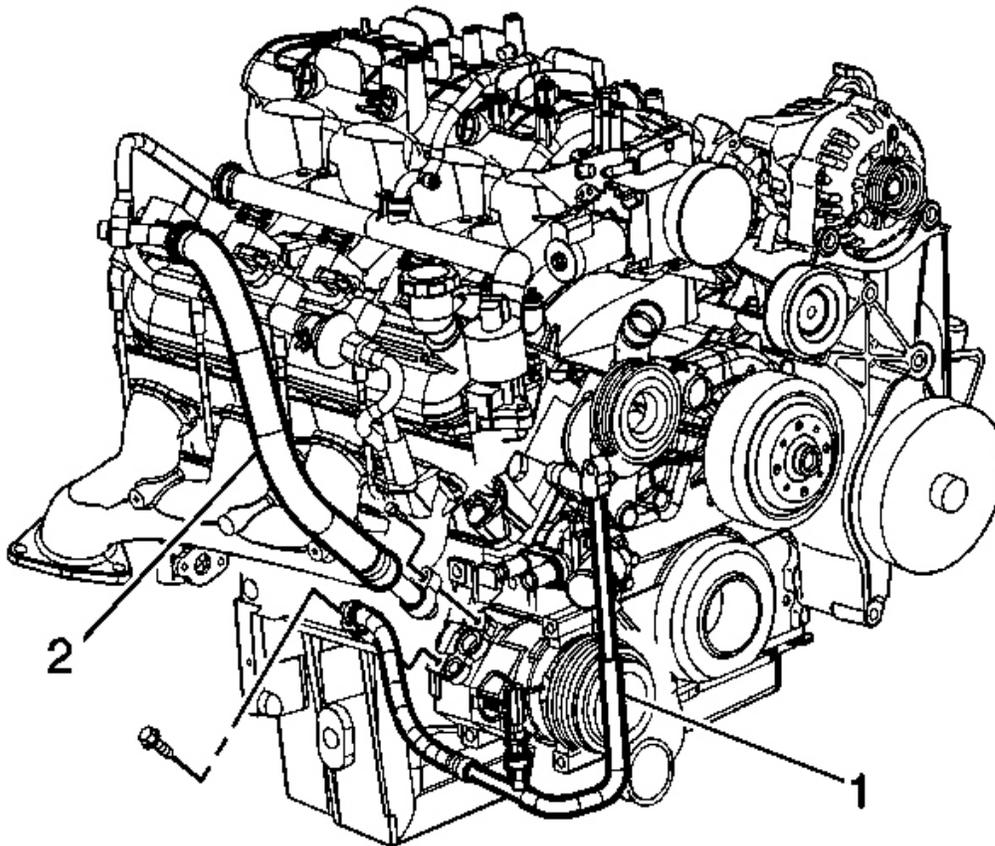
Identifying Suction/Discharge Hoses To A/C Compressor
